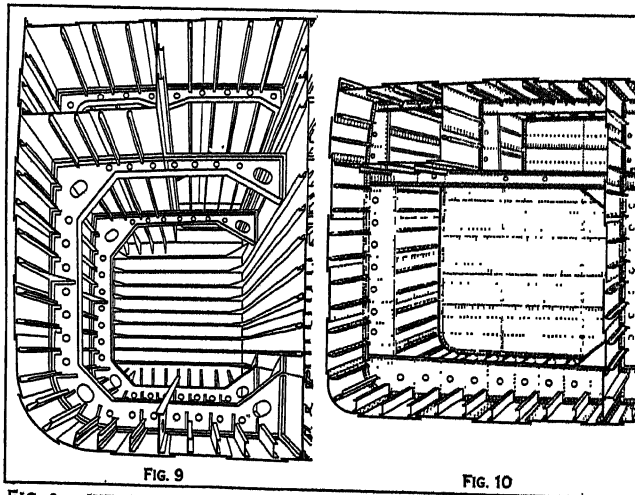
INTERNAL VIEW OF AN OIL TANK STEAMER BUILT ON THE ISHERWOOD PRINCIPLE. FIG. 10.—INTERNAL VIEW OF AN OIL TANK STEAMER BUILT ON THE BRACKETLESS SYSTEM
